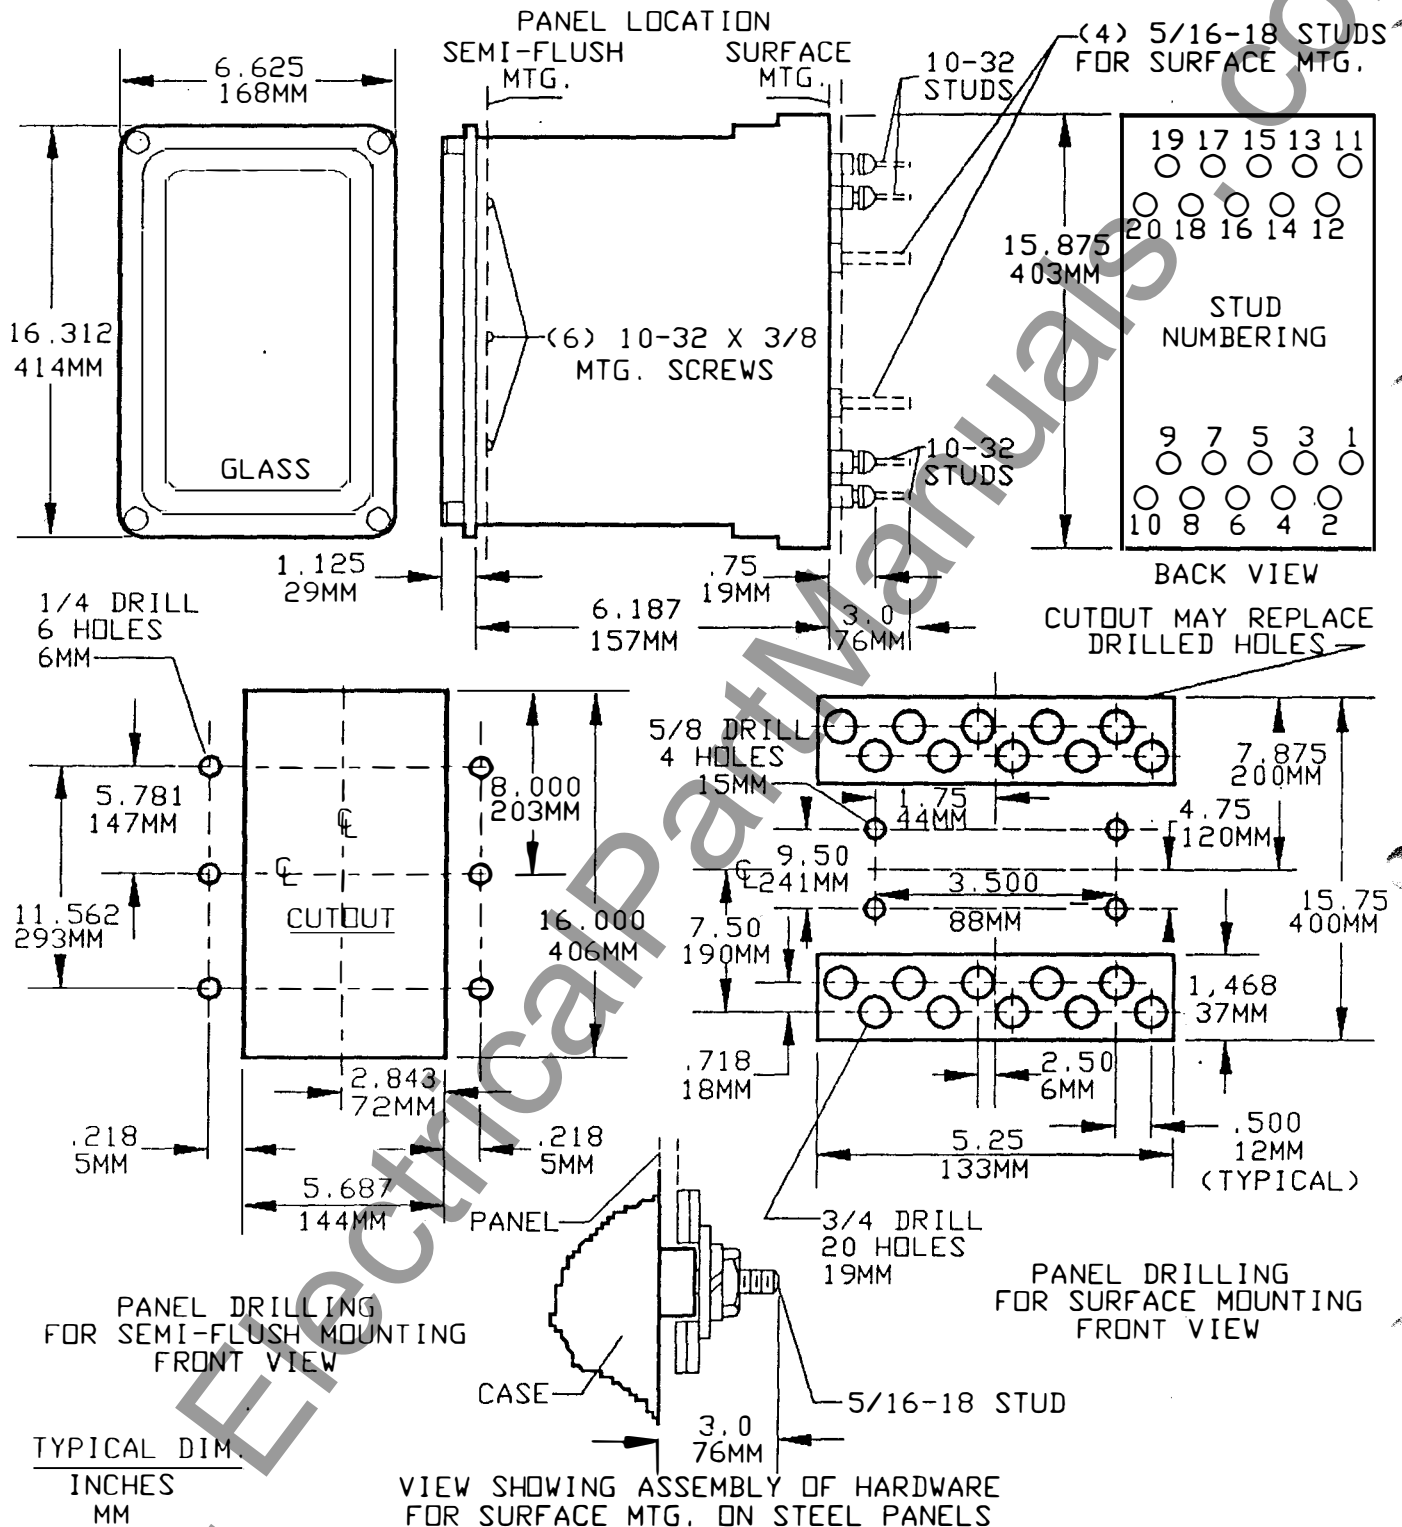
Outline and Panel Drilling Dimensions for Drawout Relays - Size M2 Case
